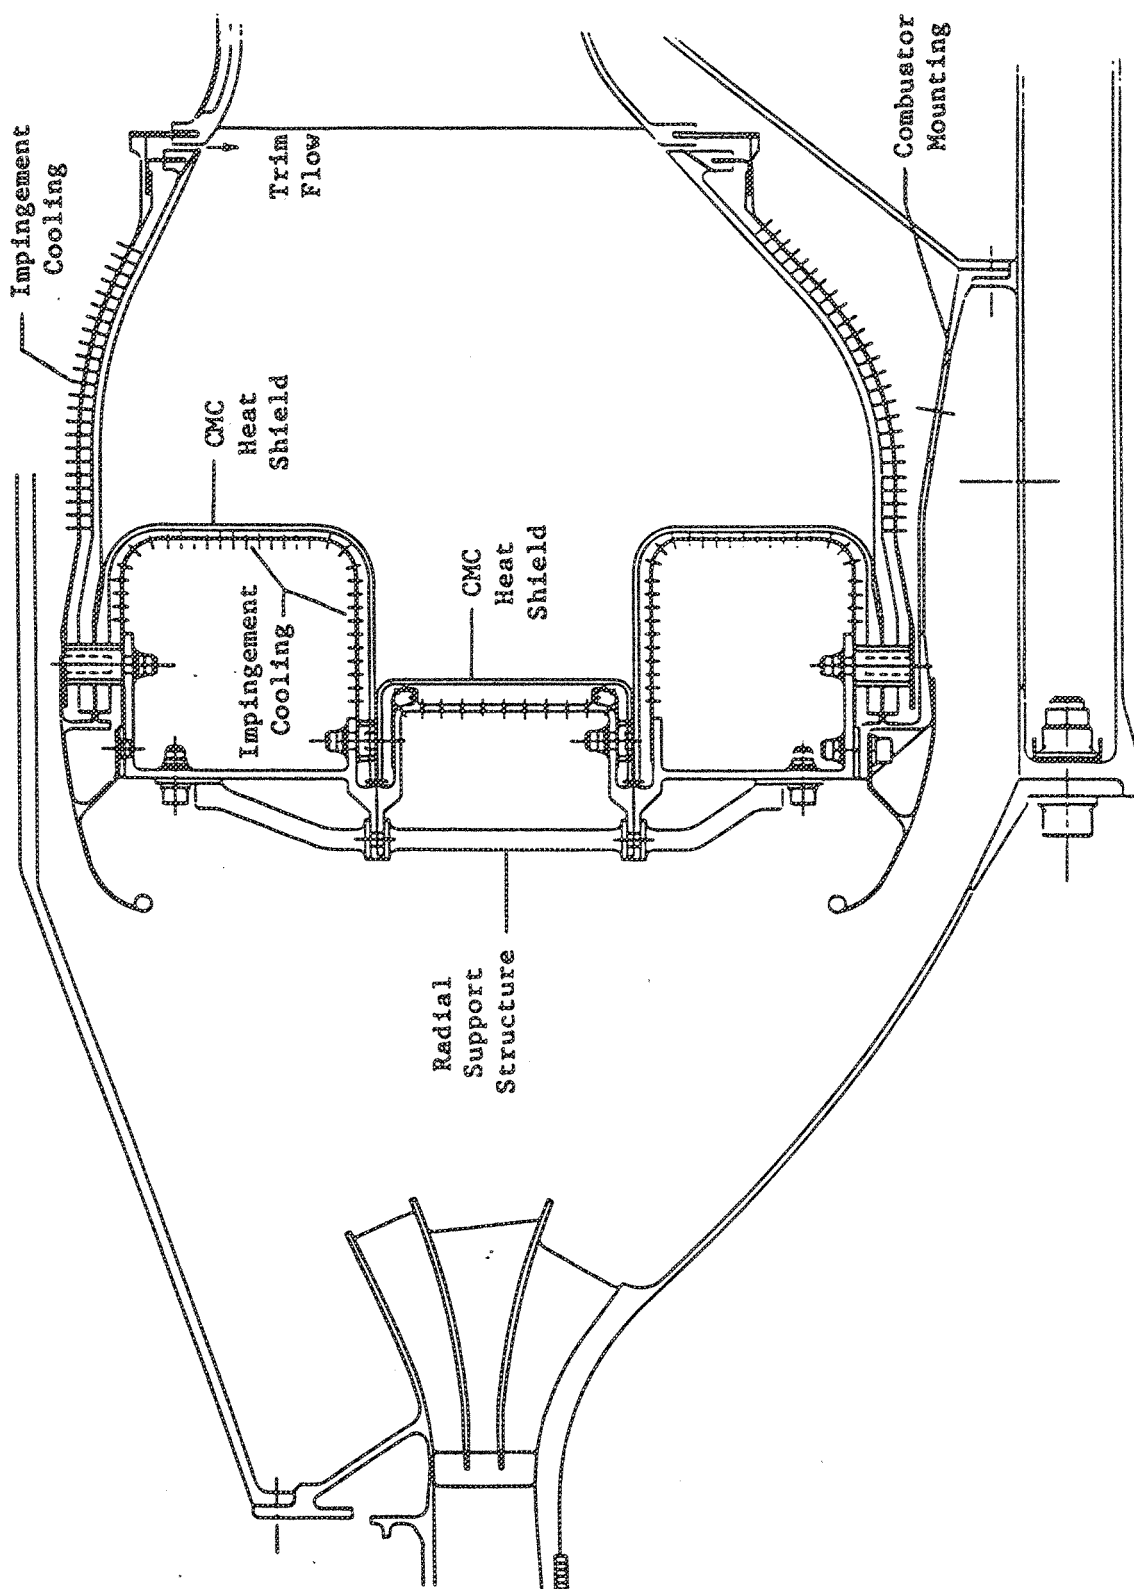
Swirl-Jet Combustor Mechanical Design Section D-D.
